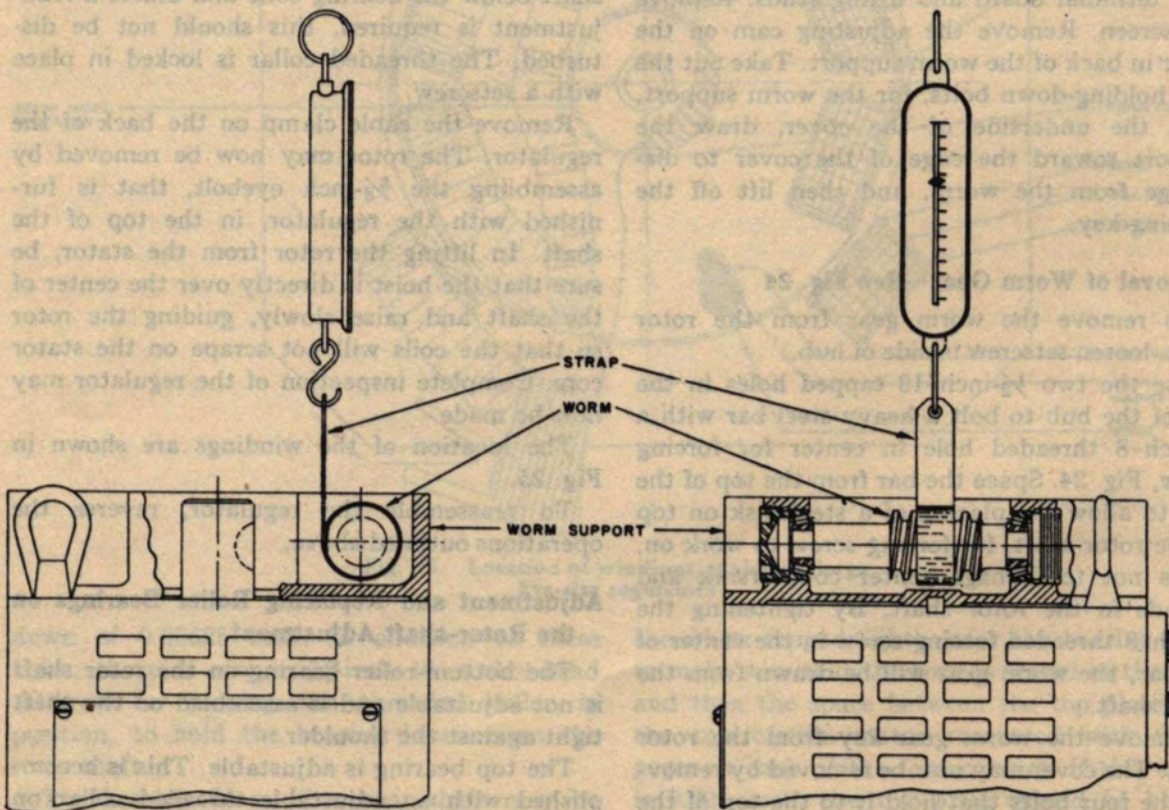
Method used to preload worm bearings, typical of small kva-size regulators
